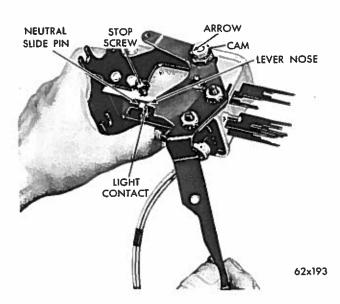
Adjusting Lever Nose Contact at Neutral Slide Pin
